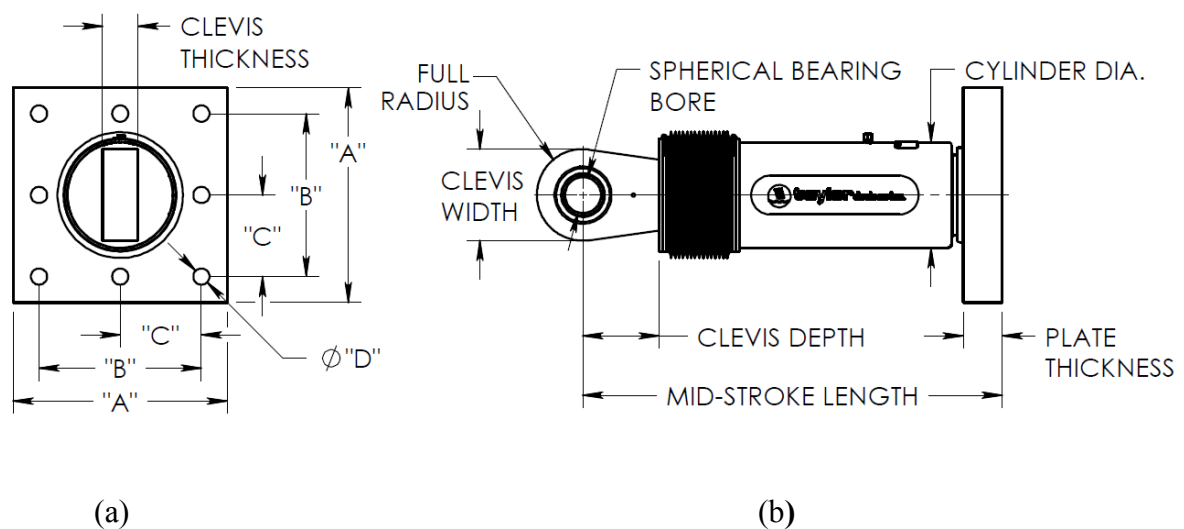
Fluid viscous damper detail and dimensions; (a) Front view, (b) Side view
